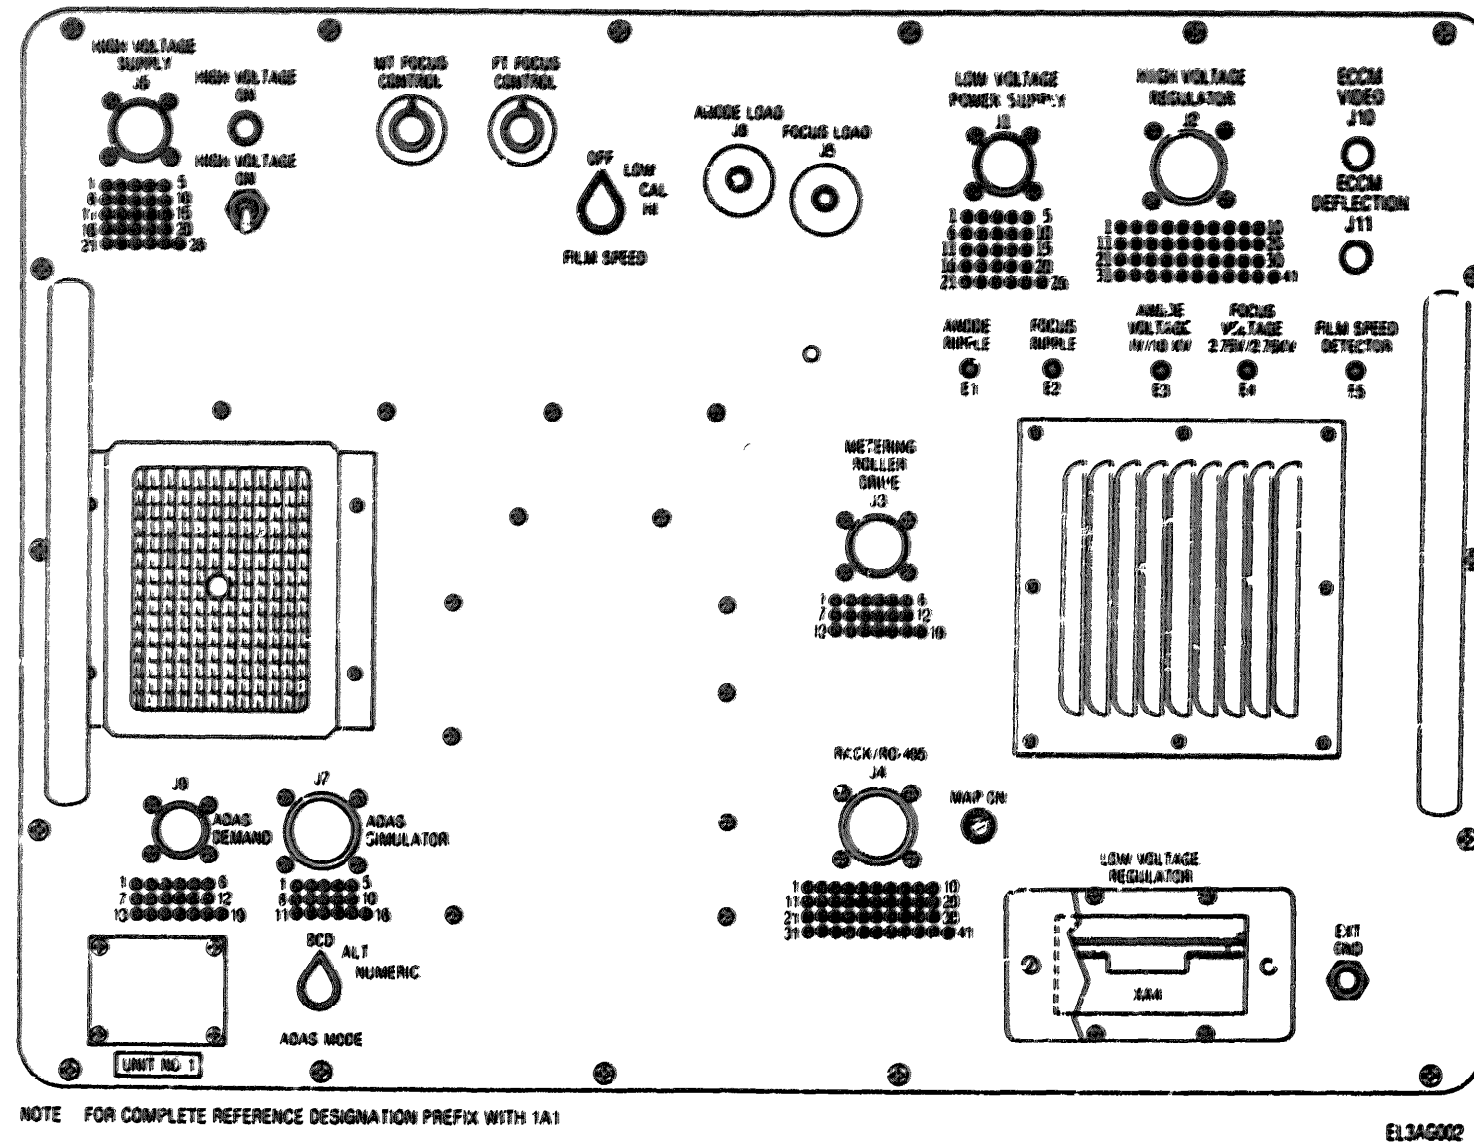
Test Set Subassembly MX-3433A/APS-94D, Unit 1A1 front panel, parts location.
